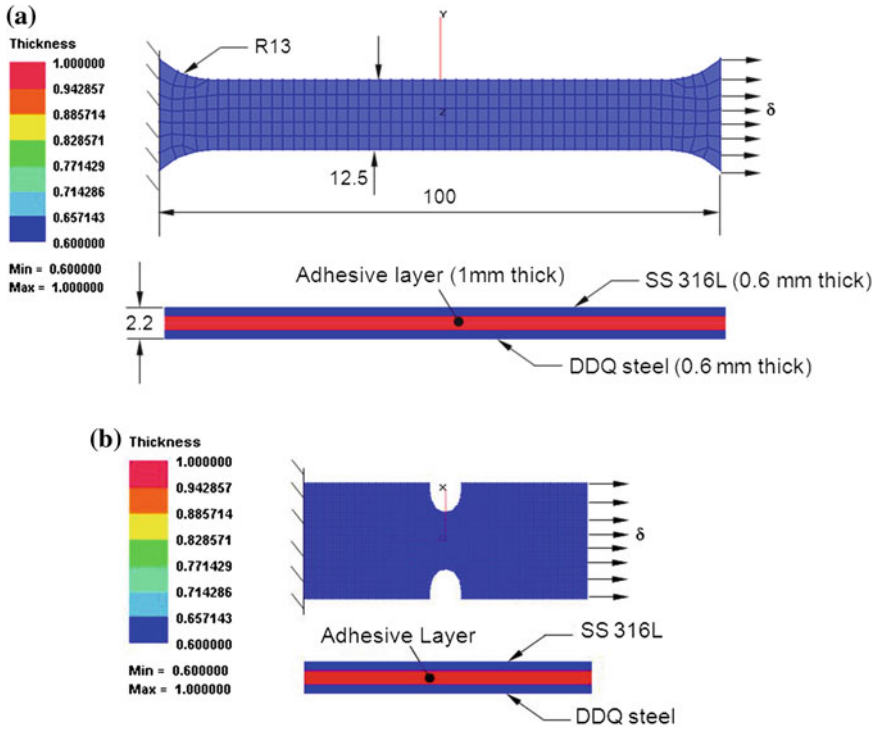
Optimized geometry of IPPS sample used in the fabrication of adhesive-bonded sheets, and all dimensions are in mm and not to scale
